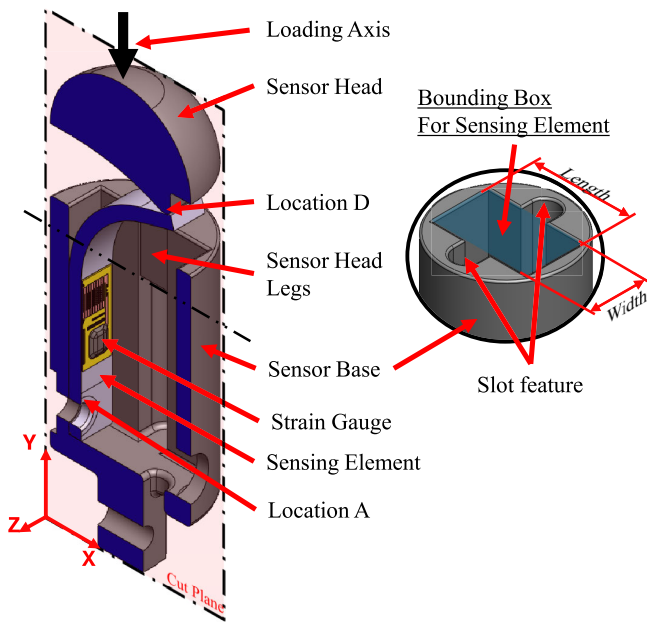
Initial sensor design concept section view, showing sensor head, sensing element, strain gauge, and sensor base components.
